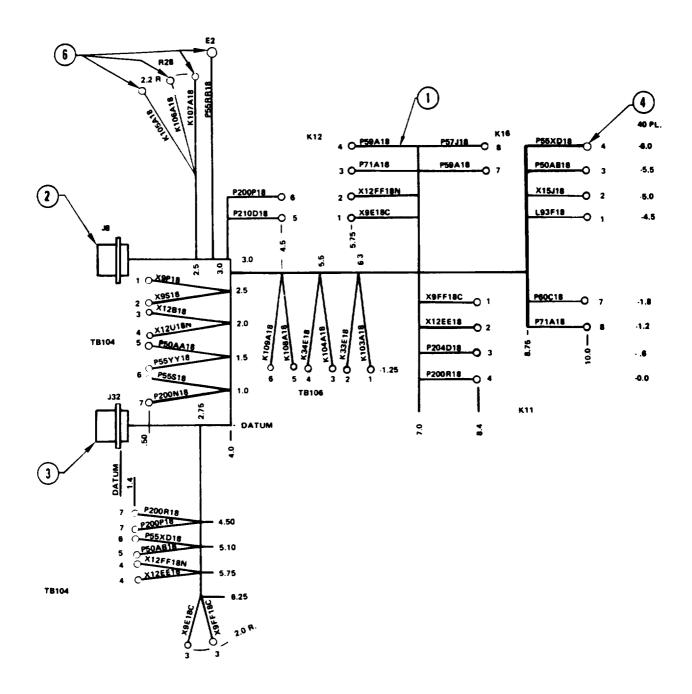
400Hz Precise Relay Assembly Wiring Harness, Drawing No. 72-2260 (Sheet 2 of 2)
